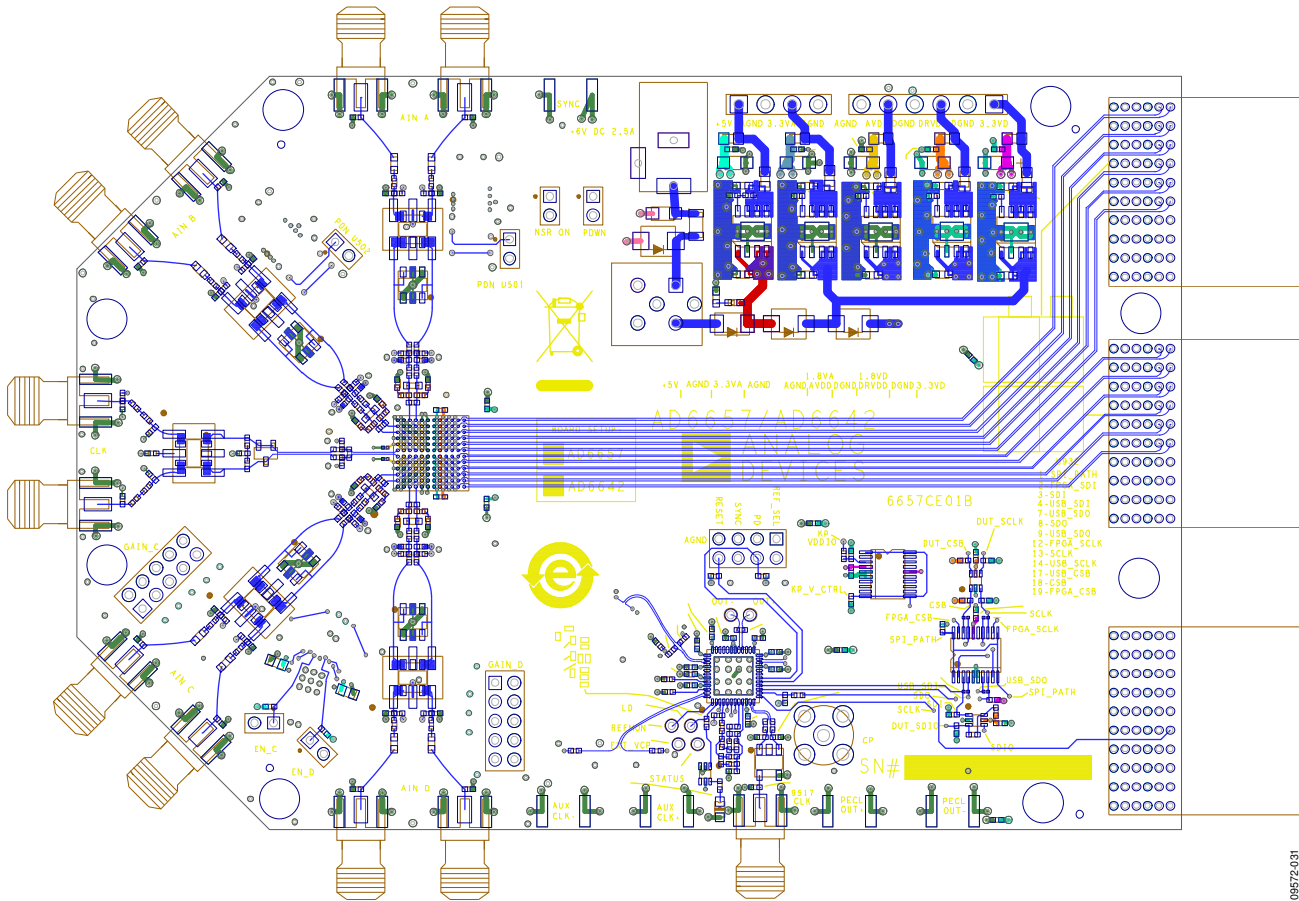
AD6657/AD6642 Evaluation Board, Top Side
